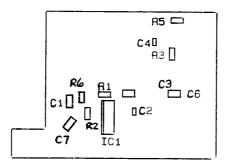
Chassis Assembly: Reference Oscillator Side B Layout
